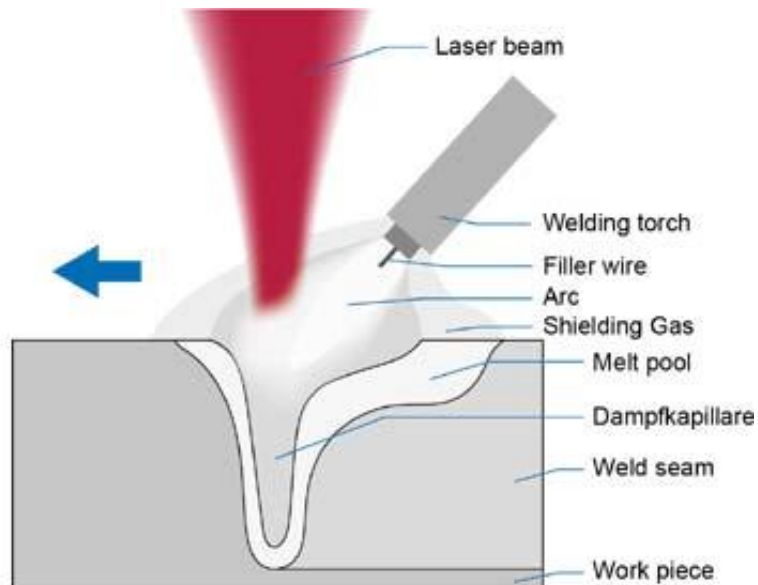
Hybrid Laser Assisted MAG welding
